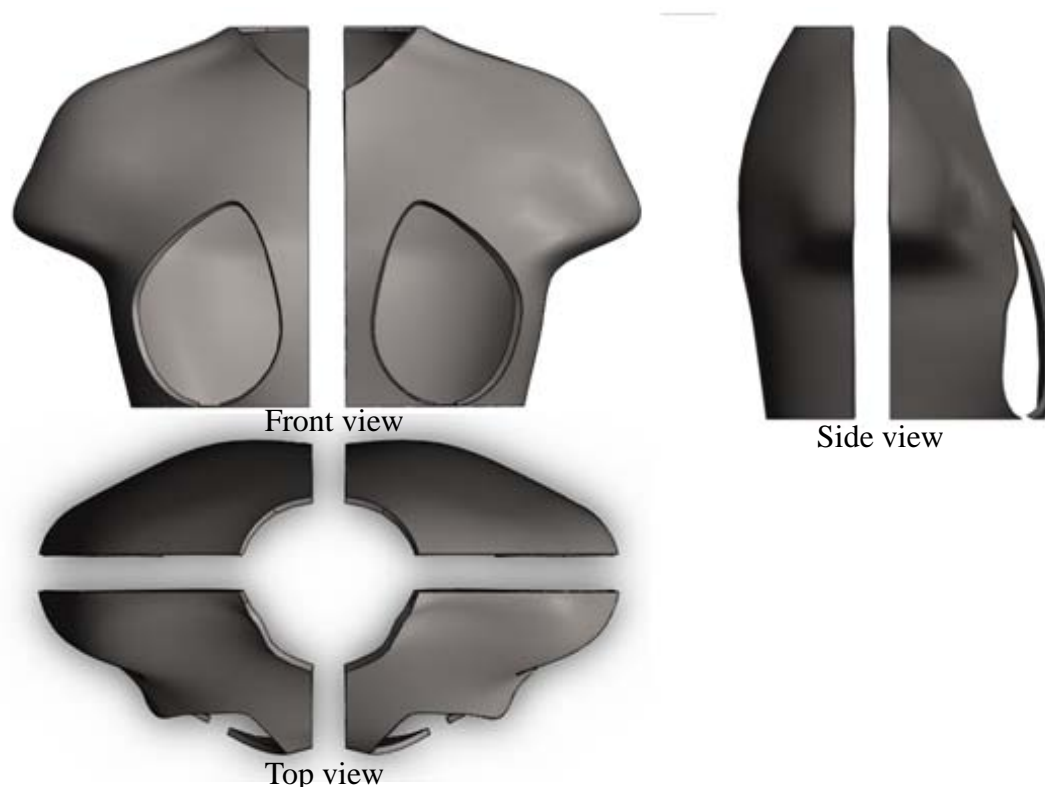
The front, side and top view of the additional part added to the shoulder.
